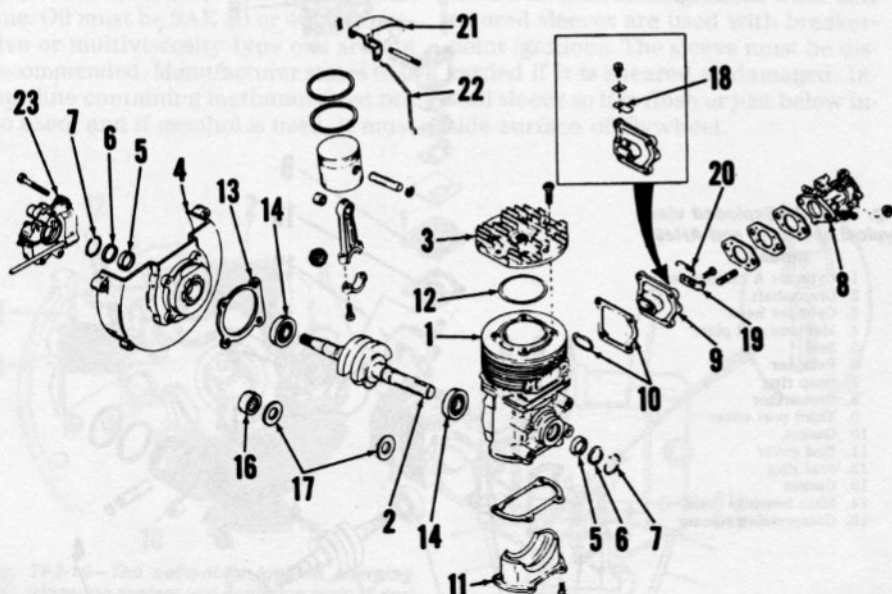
Exploded view of AH520 engine. Supplementary reed valve is shown at (18) and governor parts at (19 through 22).
